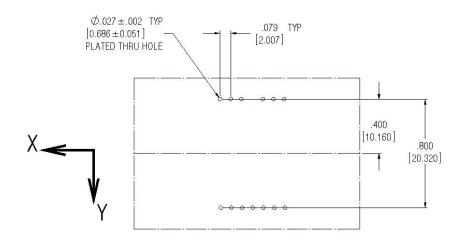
HOLE PATTERN FOR SOLDERING TO INTERFACE BOARD
